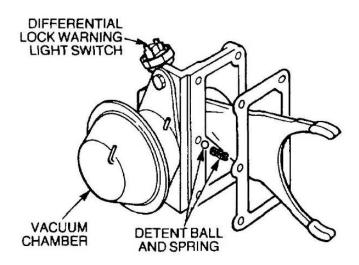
Removal of the Output Shaft Lock Vacuum Chamber Assembly
